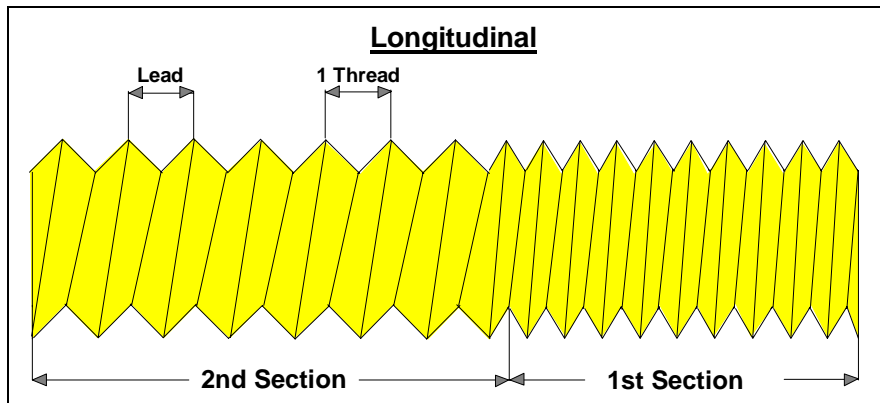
Longitudinal thread having two sections of thread each with a different lead
